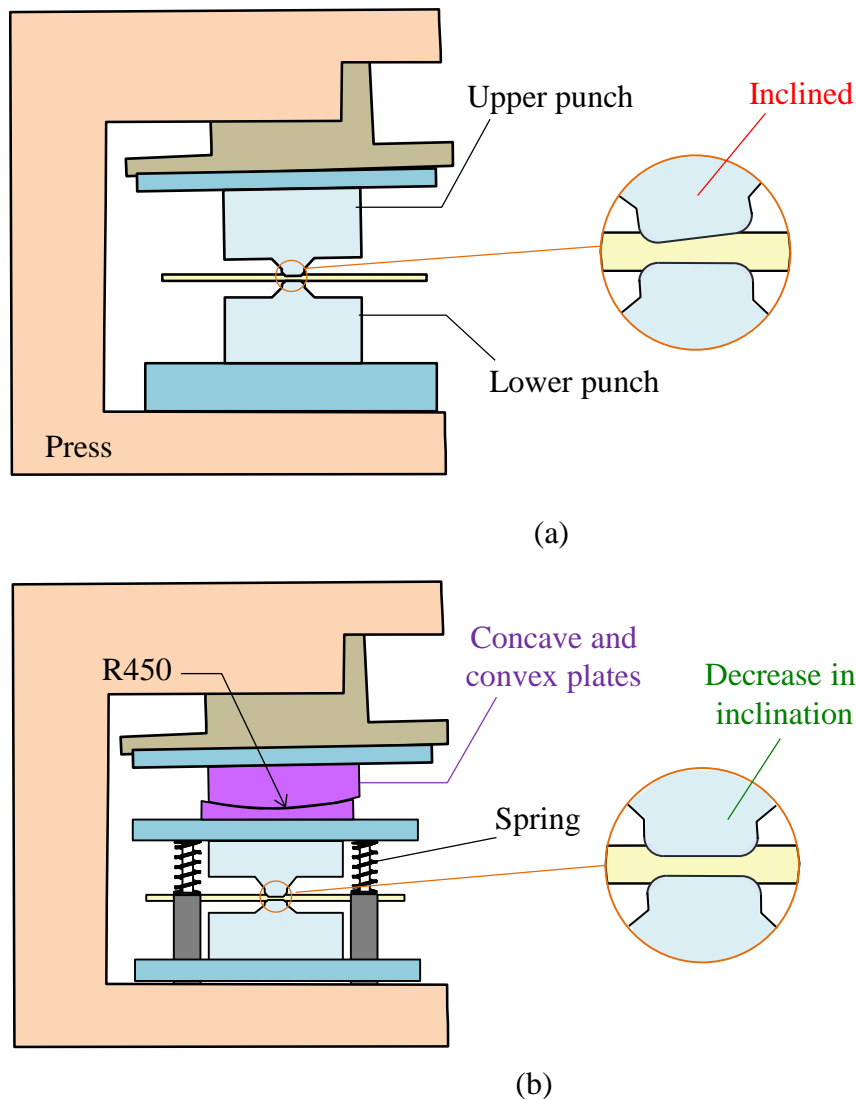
Dies (a) without and (b) with tools for correcting inclination in successive forging.
